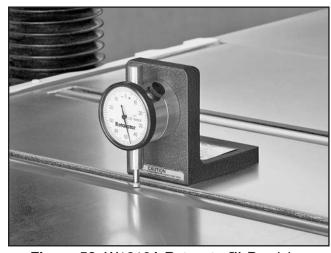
W1218A Rotacator™ Precision Planer Tool.
